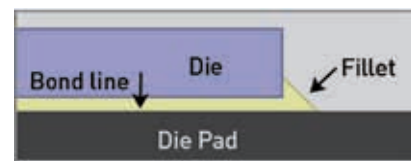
Die-attach adhesives are designed to provide tight bonds of uniform thickness with minimal extruded fillet.
